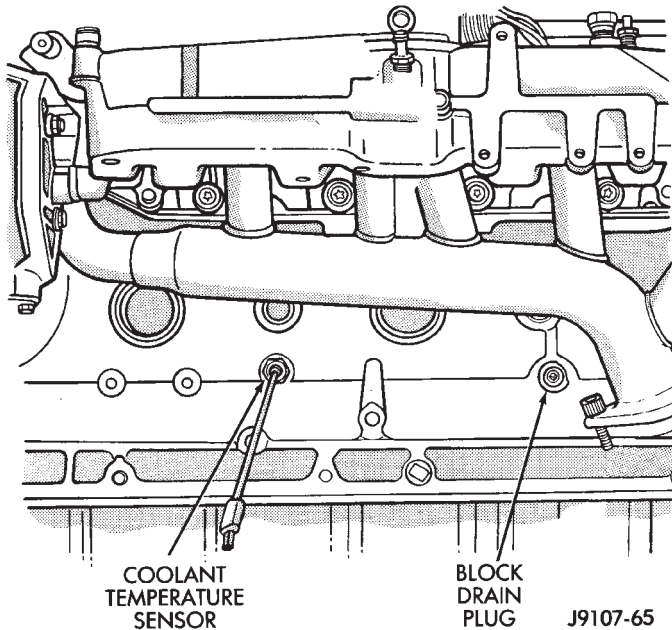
Drain Plug—4.0L 6-Cylinder Engine
